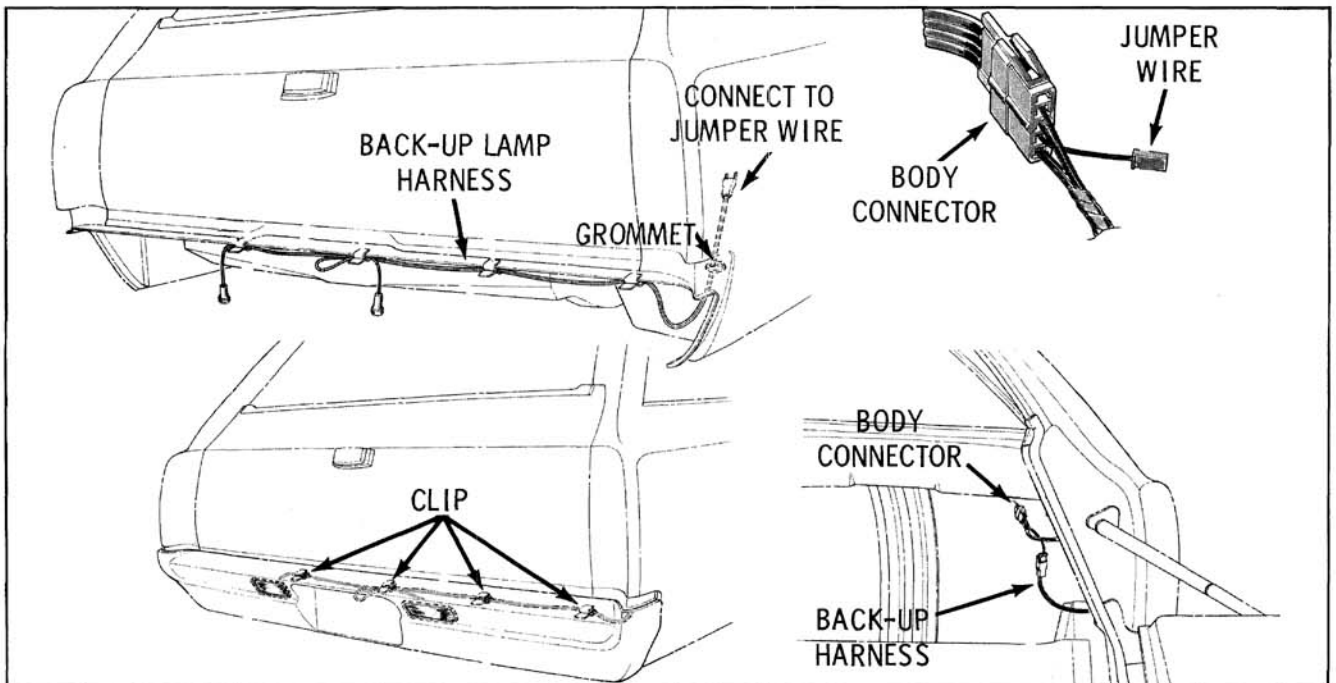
Back-Up Lamp Installation (S.W.)
